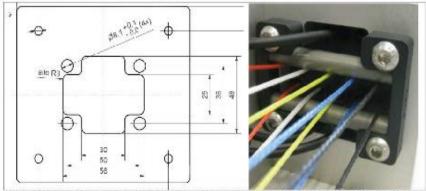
Dimensioned drawing for an optional mounting plate for the rotating joint, rotating joint view from below
